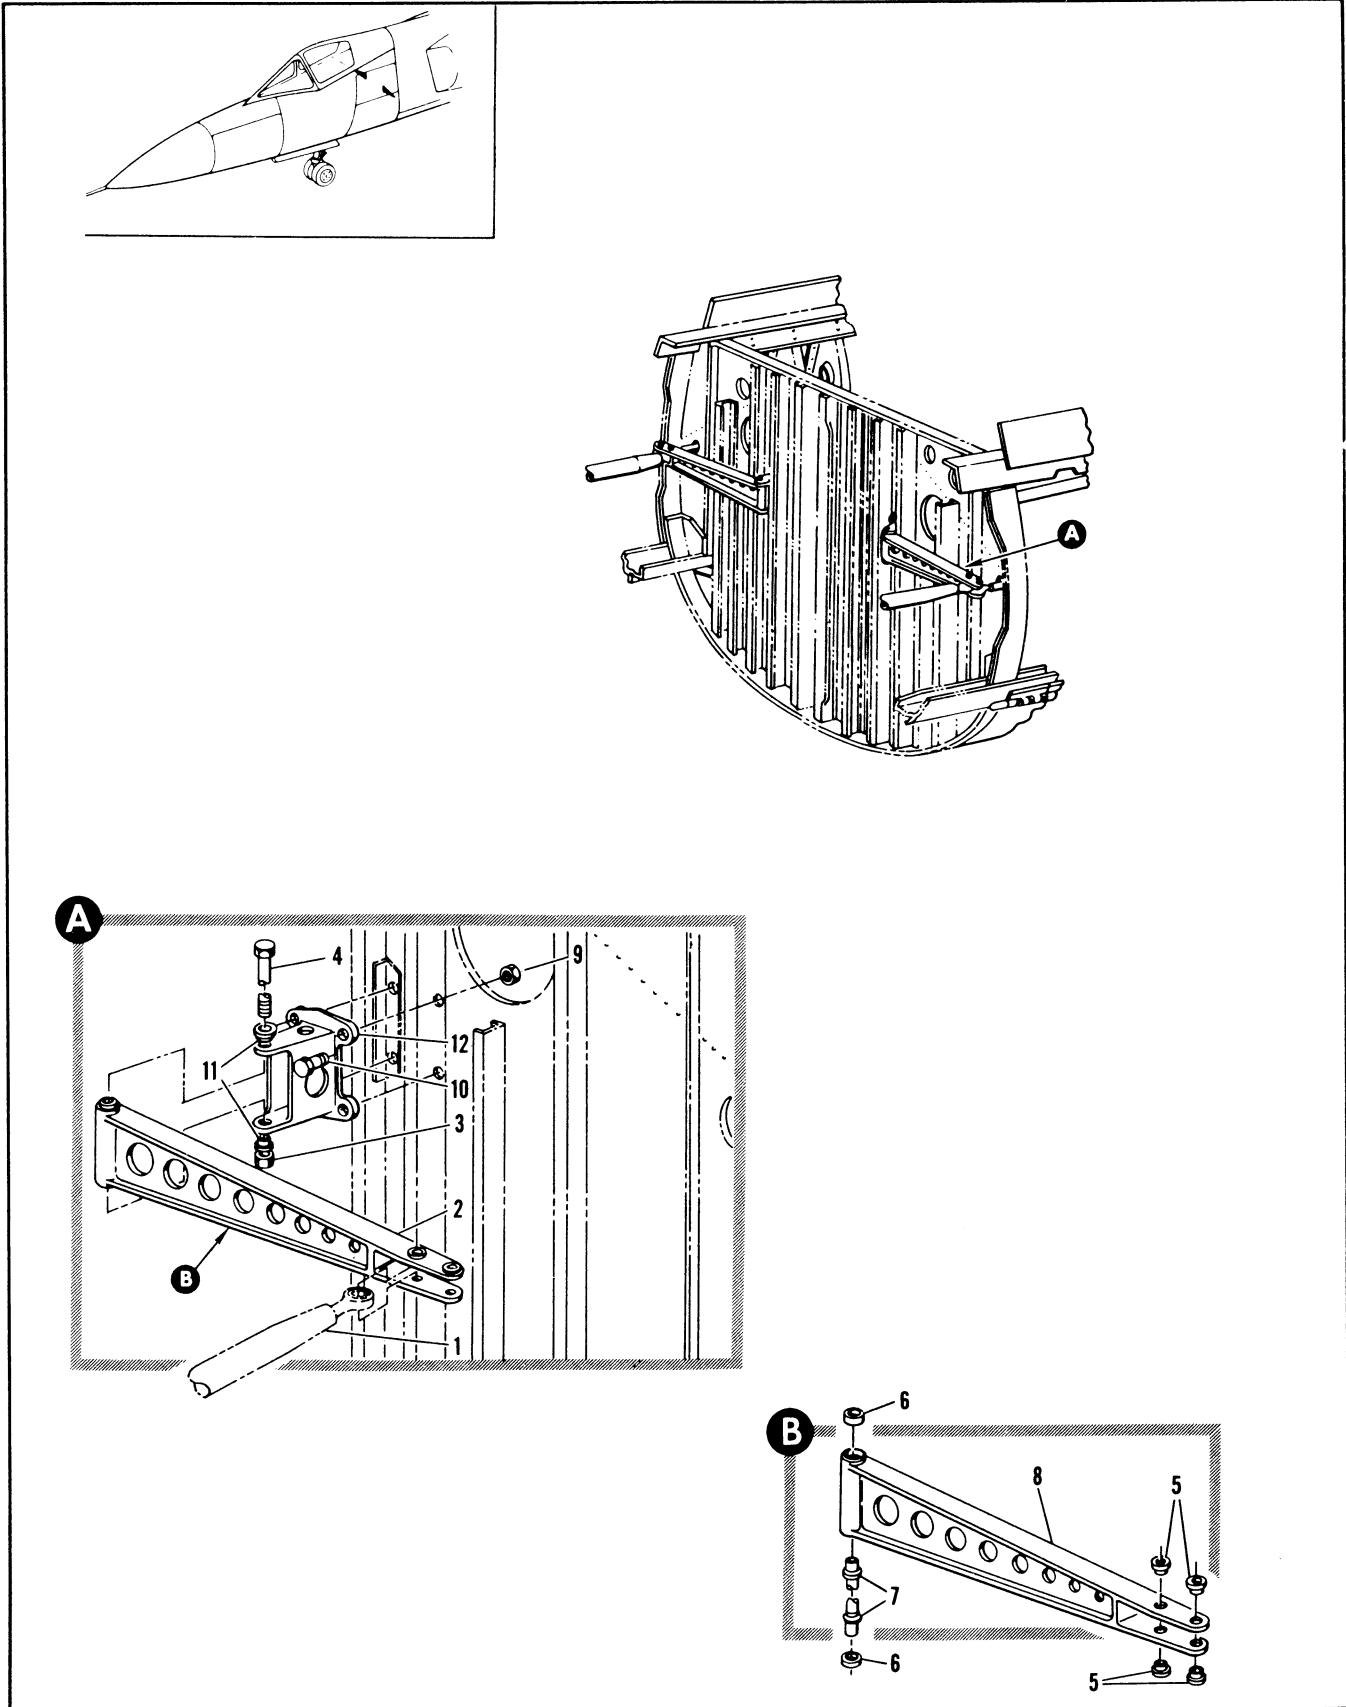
Elevator and Aileron Control Idler Installation Sta 216
